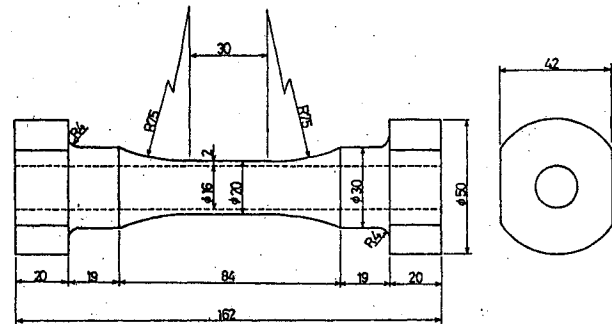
Specimen dimensions for the biaxial fatigue test.
